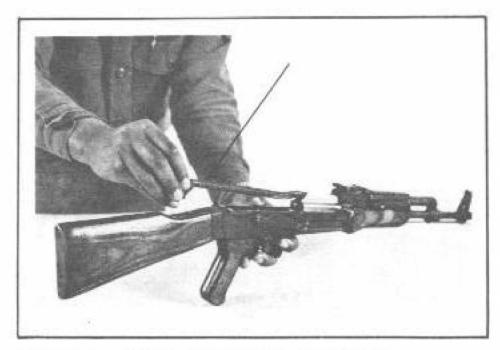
REMOVING DRIVING SPRING ASSEMBLY
